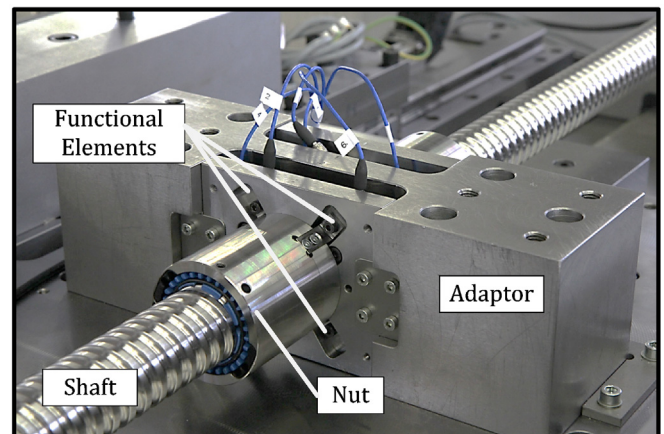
Prototype of a double nut ball screw with improved operating characteristics.
